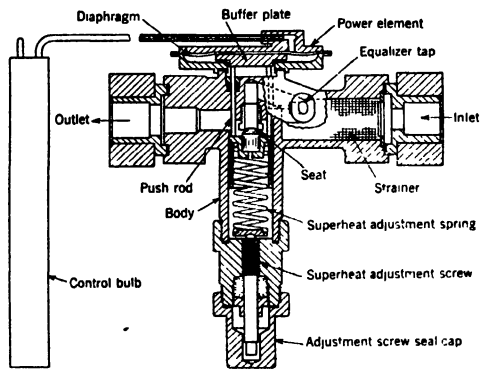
TYPICAL THERMOSTATIC EXPANSION VALVE
